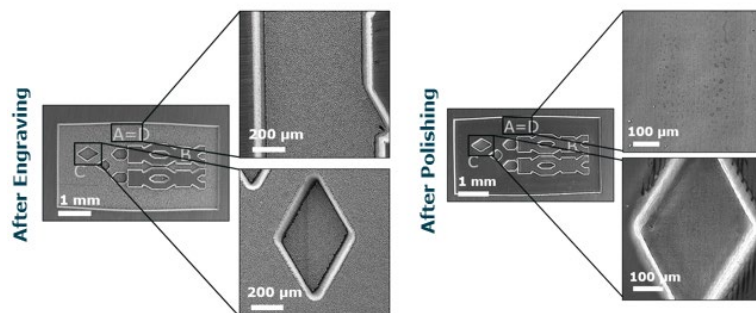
SEM images of a 1.2083 ESU stainless steel mould after engraving (left-hand side) and polishing (right-hand side) by fs GHz burst laser processing [1].
